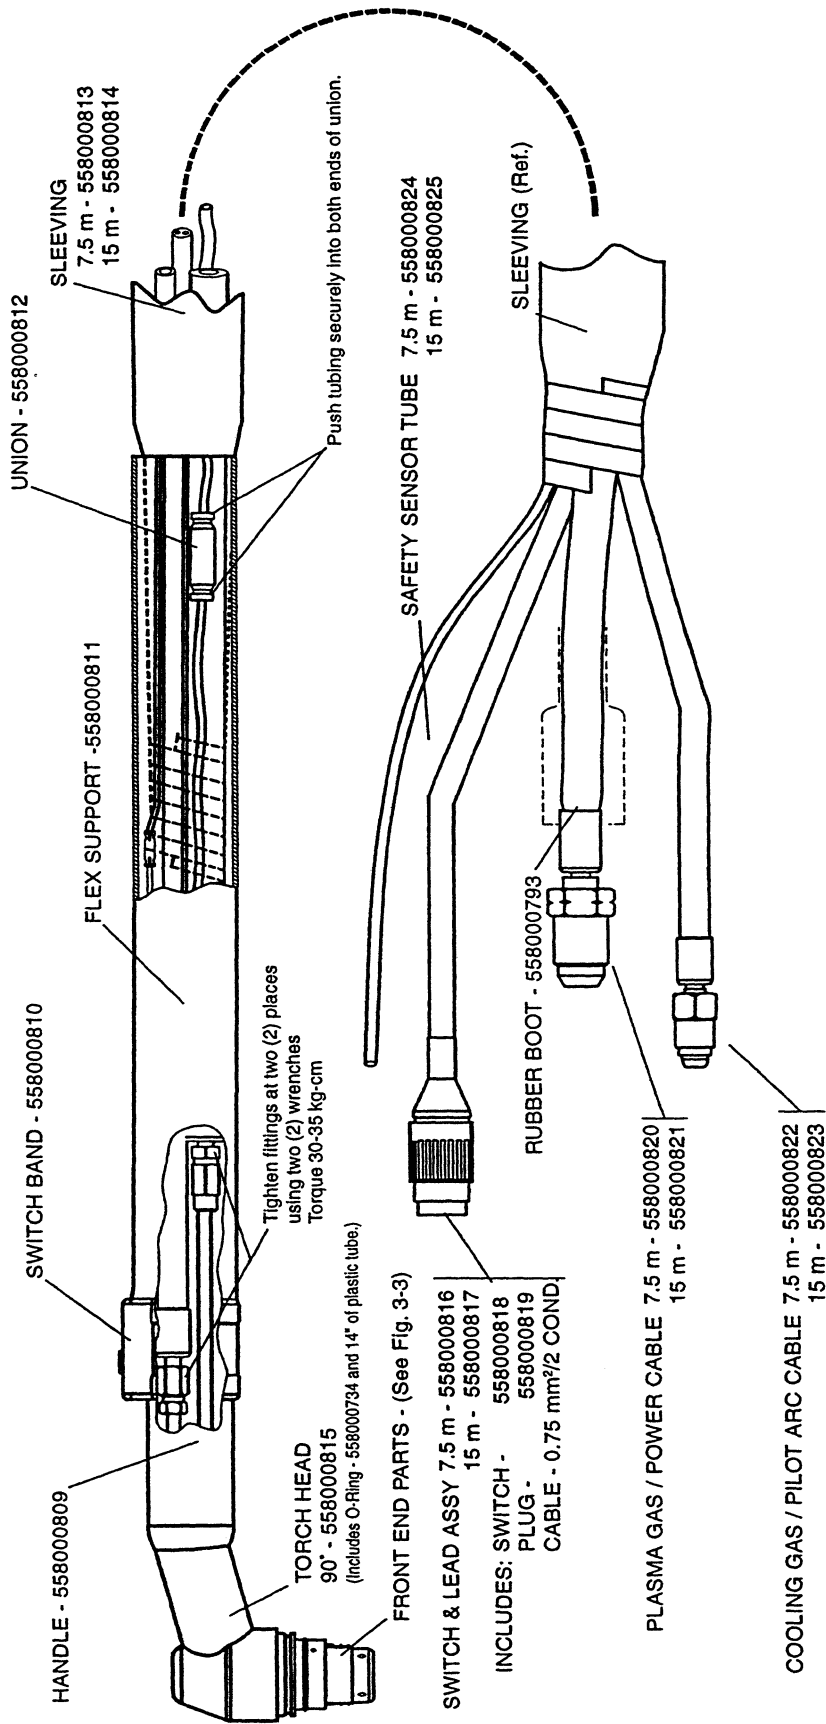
Replacement Parts - PT-25 Torch Assembly, 90° Head, 7.5 m lines - 58000724
